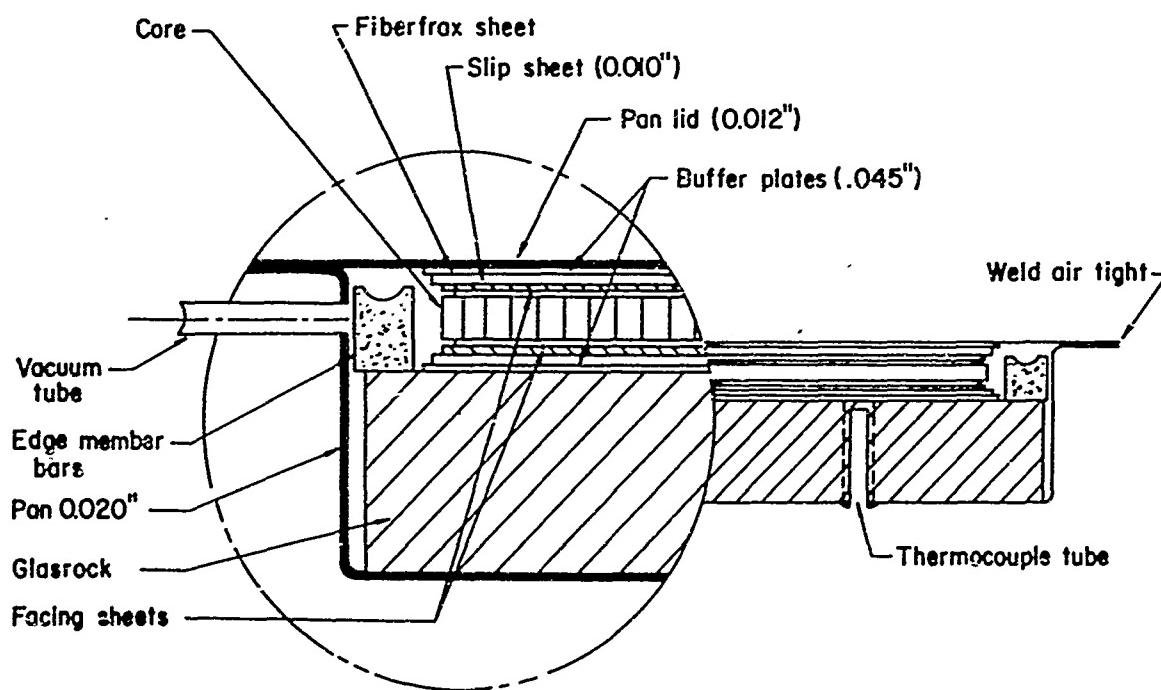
TYPICAL CERAMIC ADHESIVE BONDING VACUUM PRESSURE FIXTURE (REF. 71)
